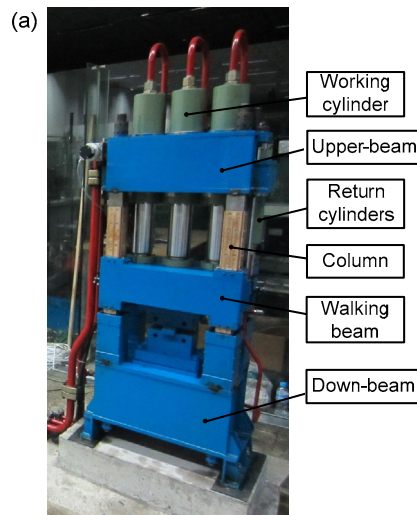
Test bench of the open circuit hydraulic pump-controlled forging press system
